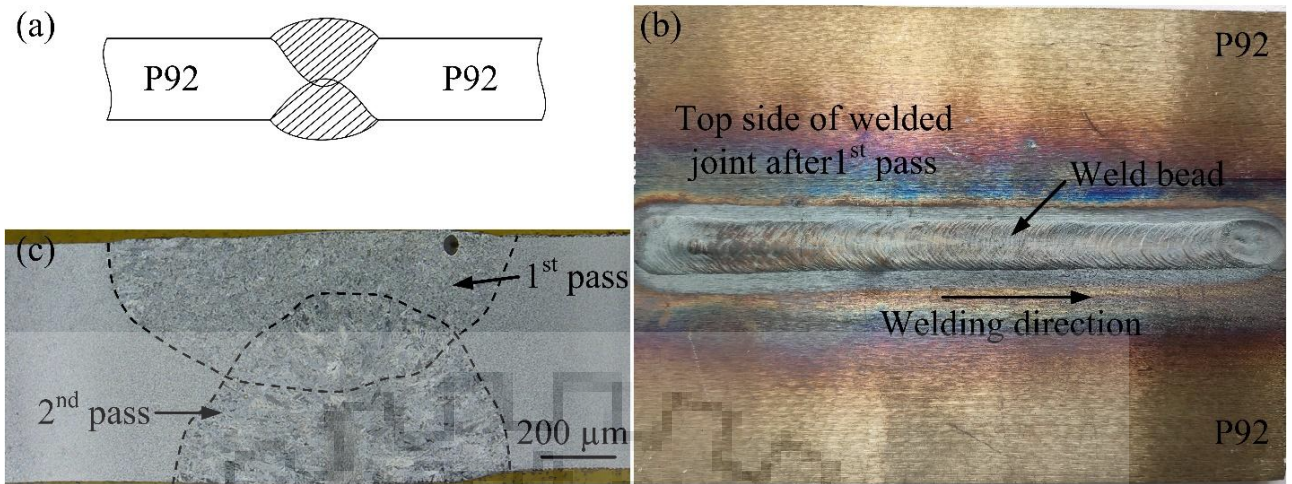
(a) Weld design of double-sided GTAW weld, (b) complete welded joint after 1st pass and (c) cross-sectional view of the weld
